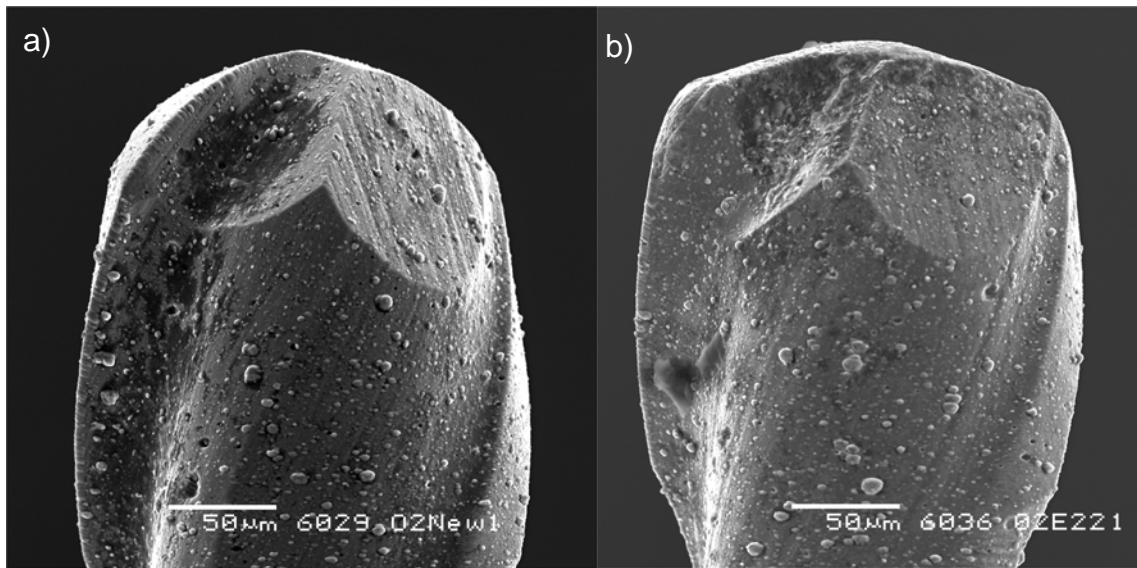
0.2 mm ball nose end mill before a) and after b) machining hardened tool steel at different inclination angles. The comparison shows that tool wear highly affects tool geometry.
